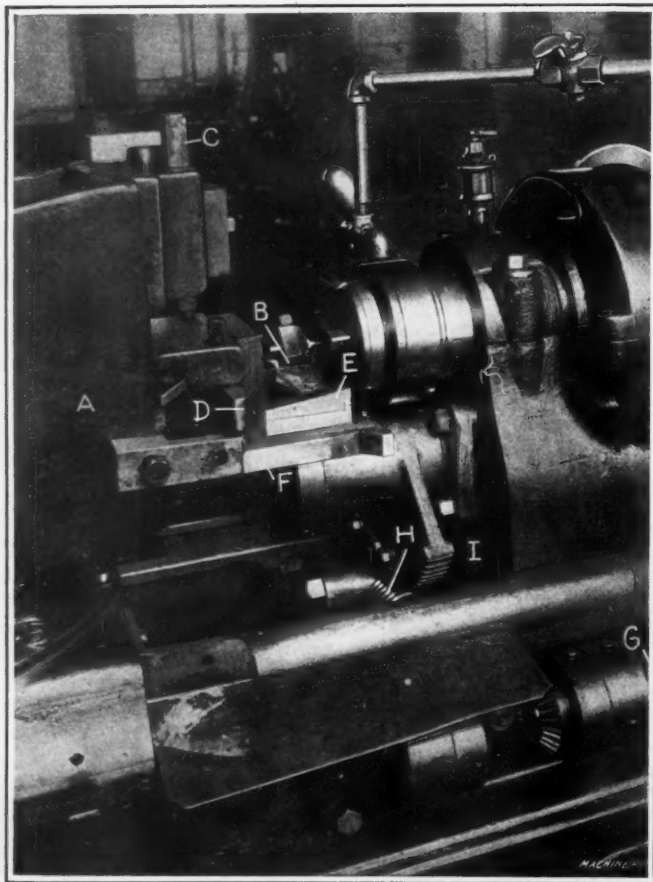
Partial Rear View of Machine showing Special Feed Mechanism for Facing Tool and Means of controlling Forming Tools
